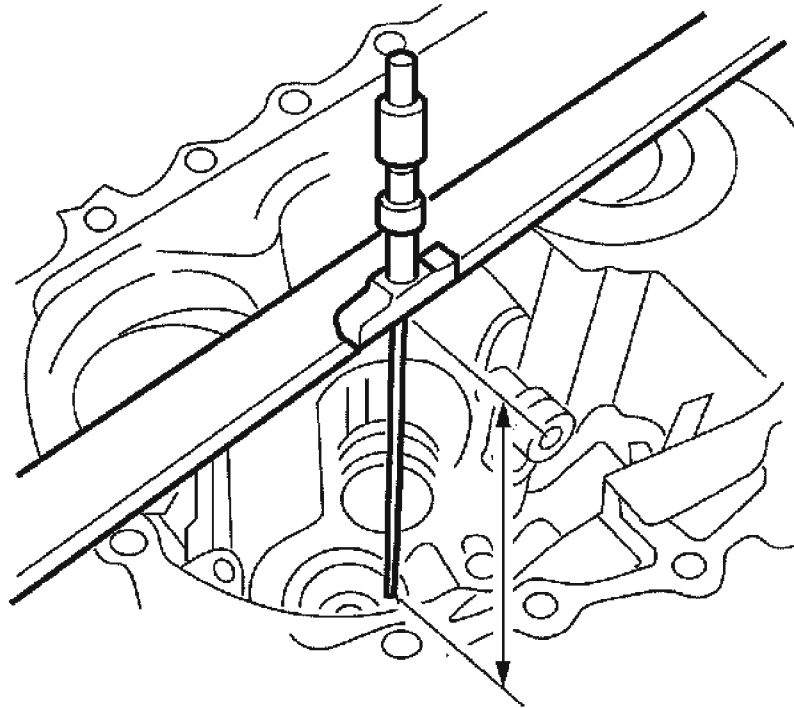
Measuring Depth Of Transaxle Case To Mainshaft Bearing Surface
